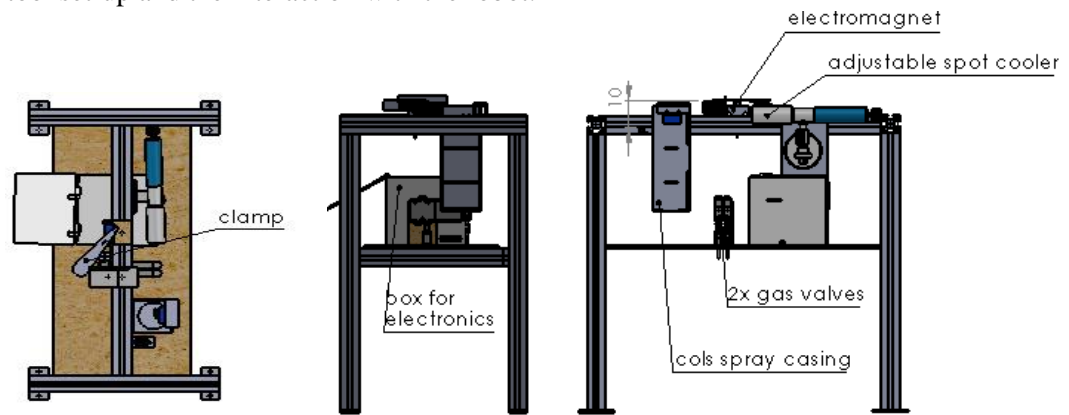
Set-up of the Self Developed Film Removal Tool Prototype
